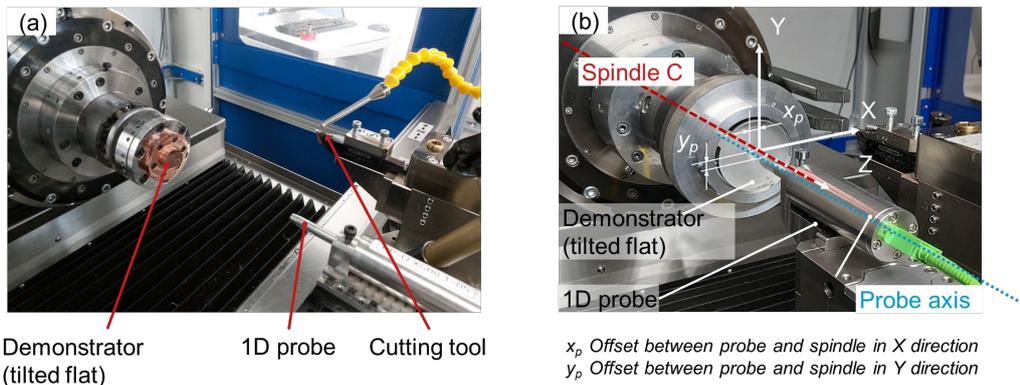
(a) The on-machine metrology system, integrated on an ultra-precision turning machine. (b) The probe offsets in X and Y direction with respect to the machine tool coordinate system.
